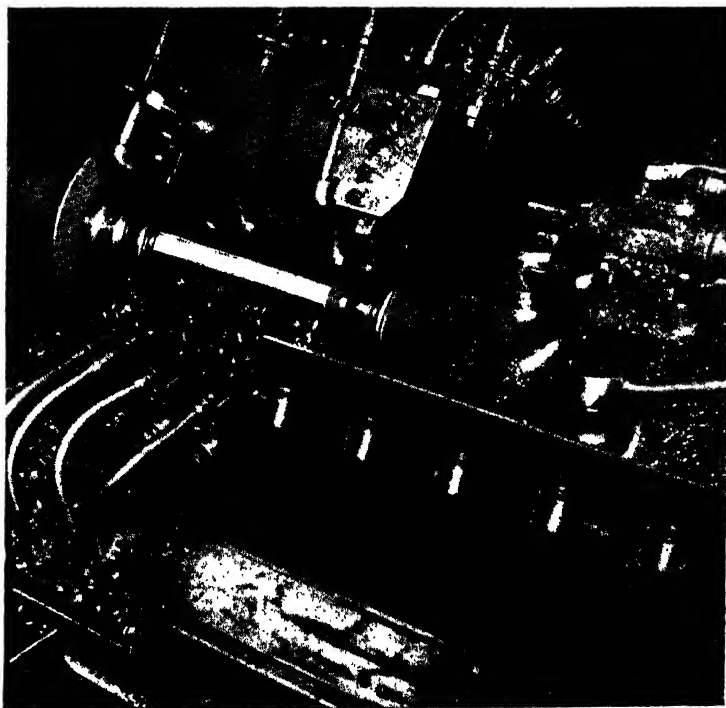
Automatic Lathe Tooled for Turning a Spherical Surface on Steel Trunnion Sockets
